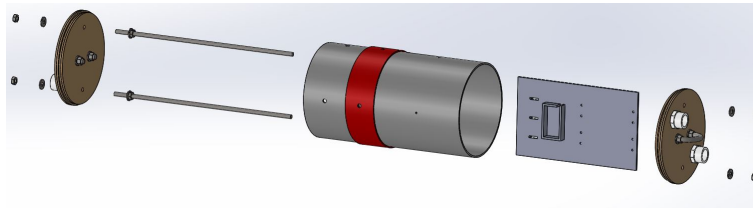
Exploded view of the AV bay with bulkheads and internal components.
